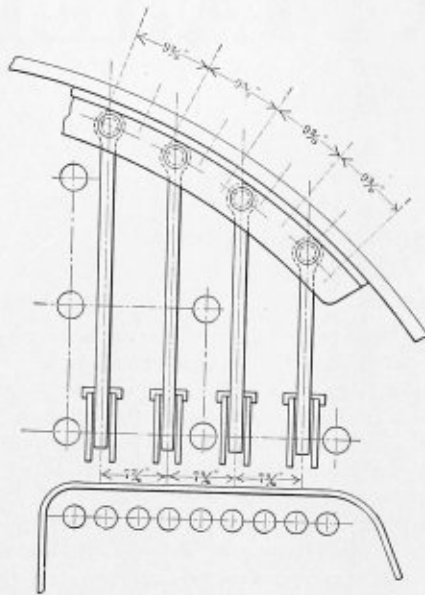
DOUBLE HANGING GIRDER STAYS.
